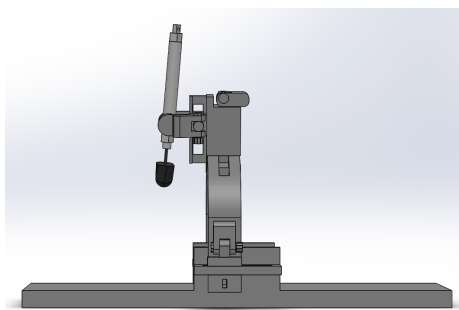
3D model of a mechanical tapping device assembly (Side view)
